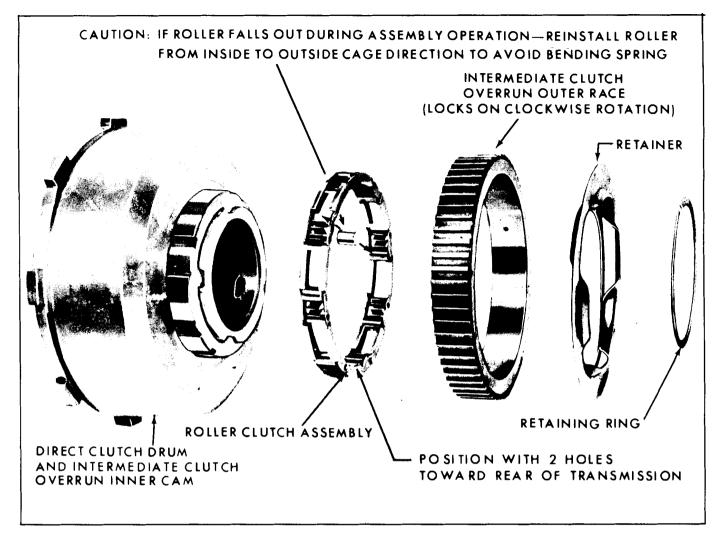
G-101 Exploded View of Intermediate Overrun Clutch
